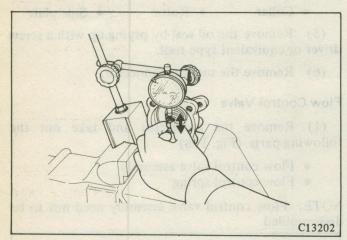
Measuring Clearance Between the shaft and Pump Body (Bushing)
